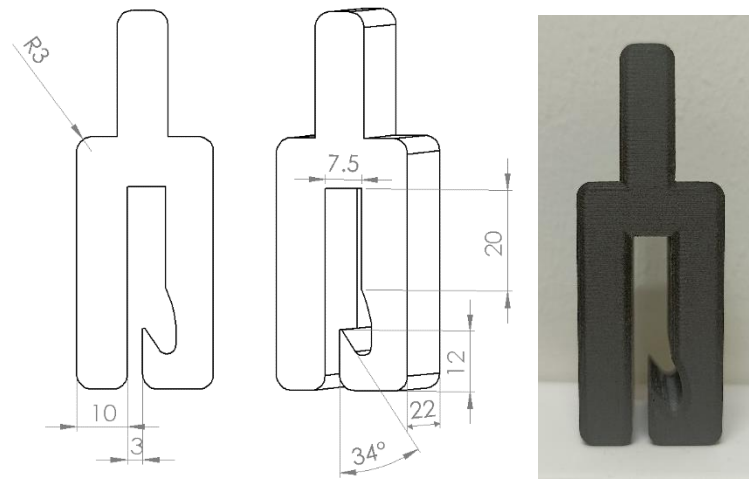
Redesigning of shear test fixture and actual 3D printed fixture
